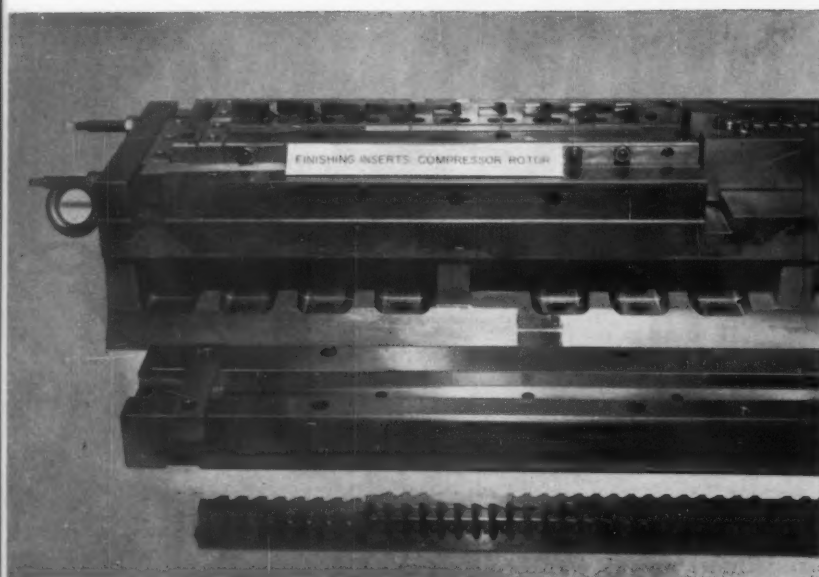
Part of the broaches used for cutting forged titanium-alloy compressor rotors. Solid roughing broach is in foreground, and finishing inserts at rear.
